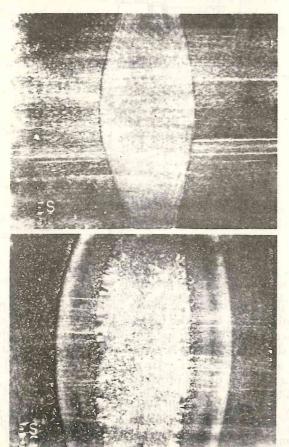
Showing macrostructure of slag weld (above) as welded (below) as normalised
